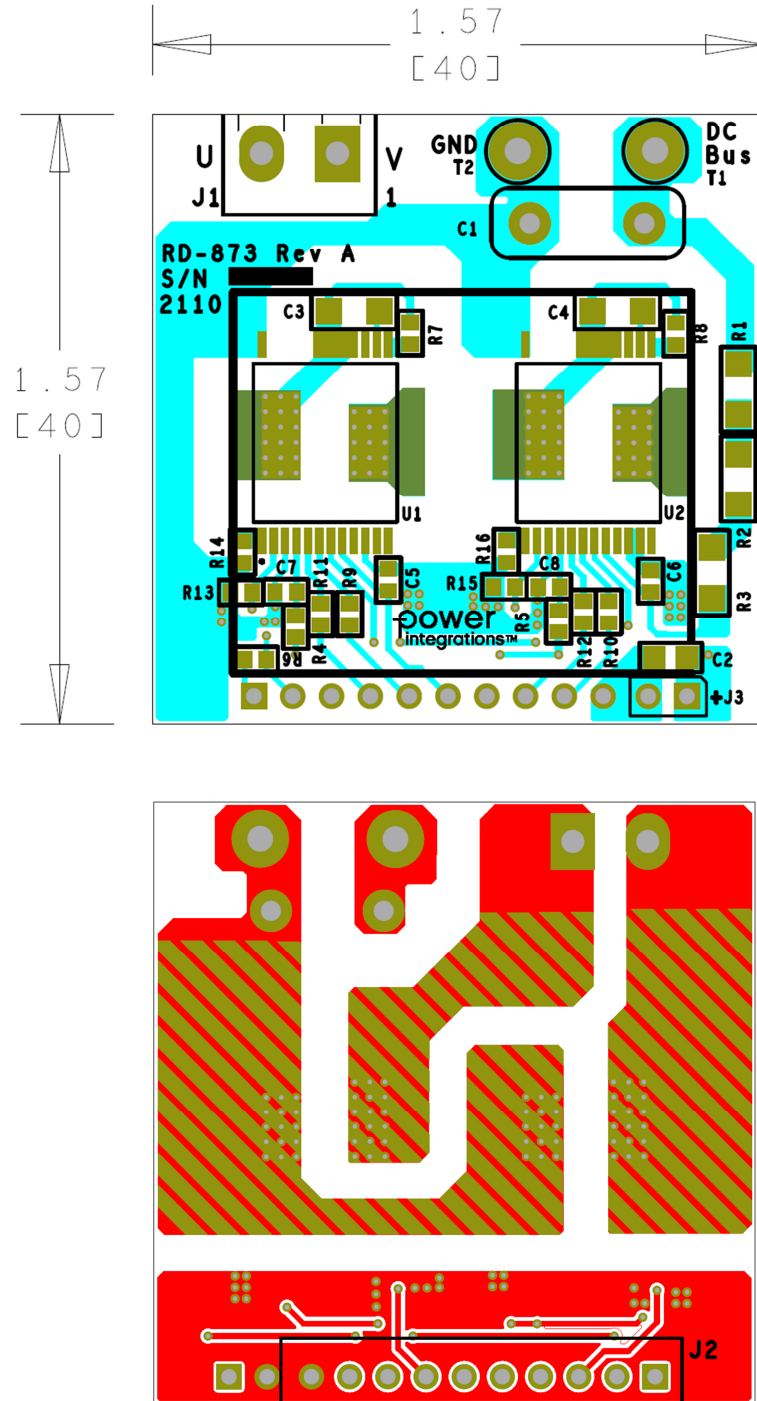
Printed Circuit Board Layout Top and Bottom View.
